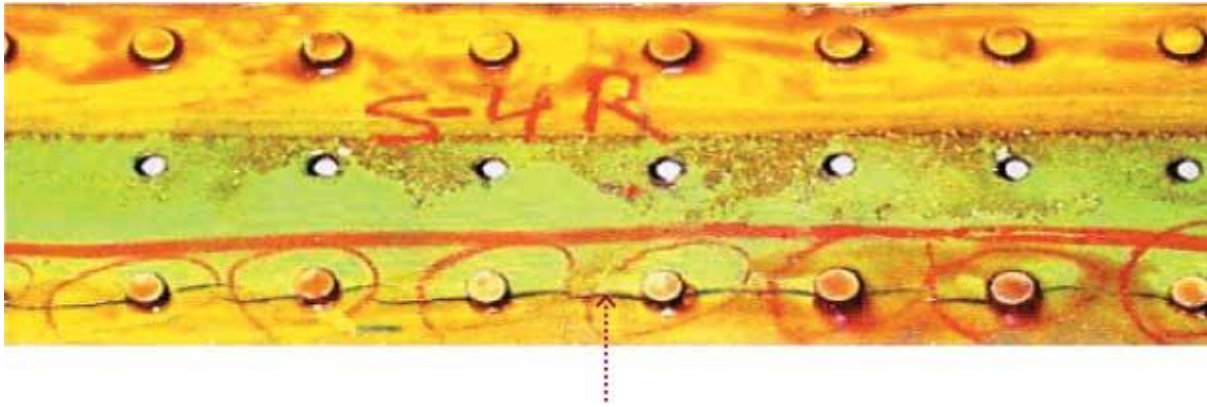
Crack marked in red. The crack spread through riveting joints in the stiffener as these were points of high stress concentration.
